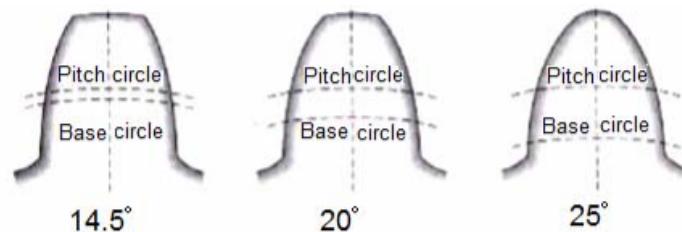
Gear Tooth Profile for different Pressure Angles
